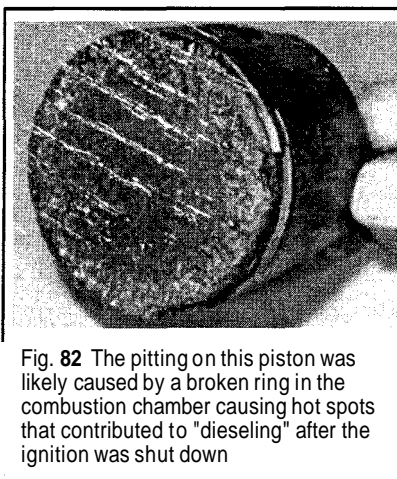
The pitting on this piston was likely caused by a broken ring in the combustion chamber causing hot spots that contributed to "dieseling" after the ignition was shut down
